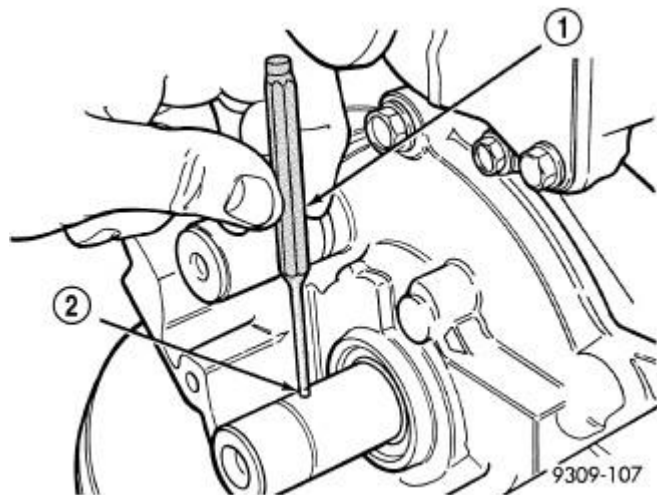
Crankshaft Sprocket Dowel Pin-Removal/Installation
